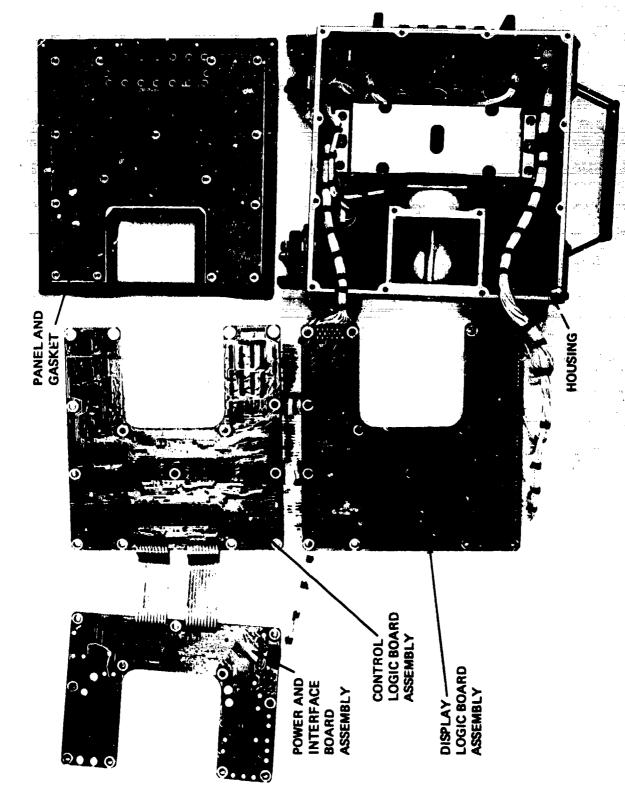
XM36E1 FUZE SETTER WITH PANEL REMOVED - TOP VIEW
